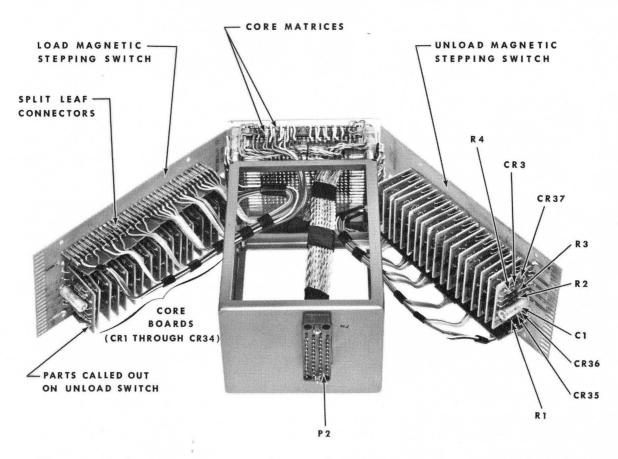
Storage System and Magnetic Stepping Switches For 144-BQ-8A Buffer, Parts Identification
